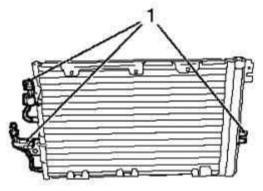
Mounting the condenser: 1 - bolts fastening
